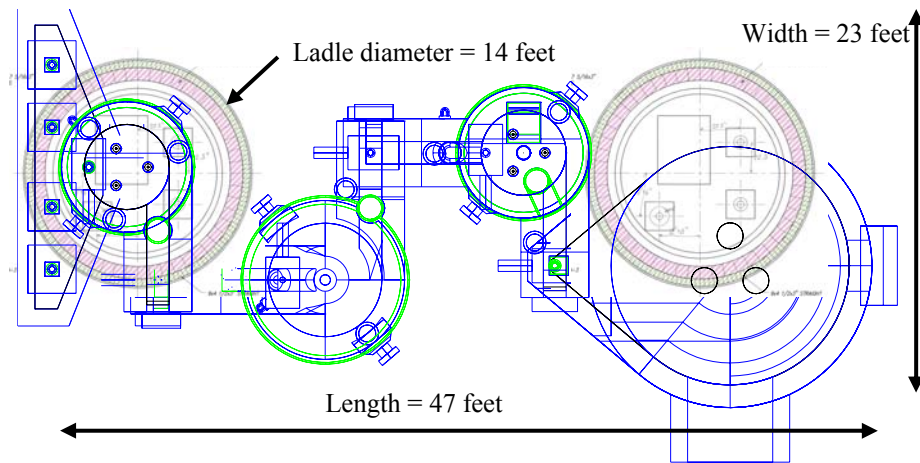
Top view of continuous steelmaking superimposed on two ladles sitting on a typical turret
